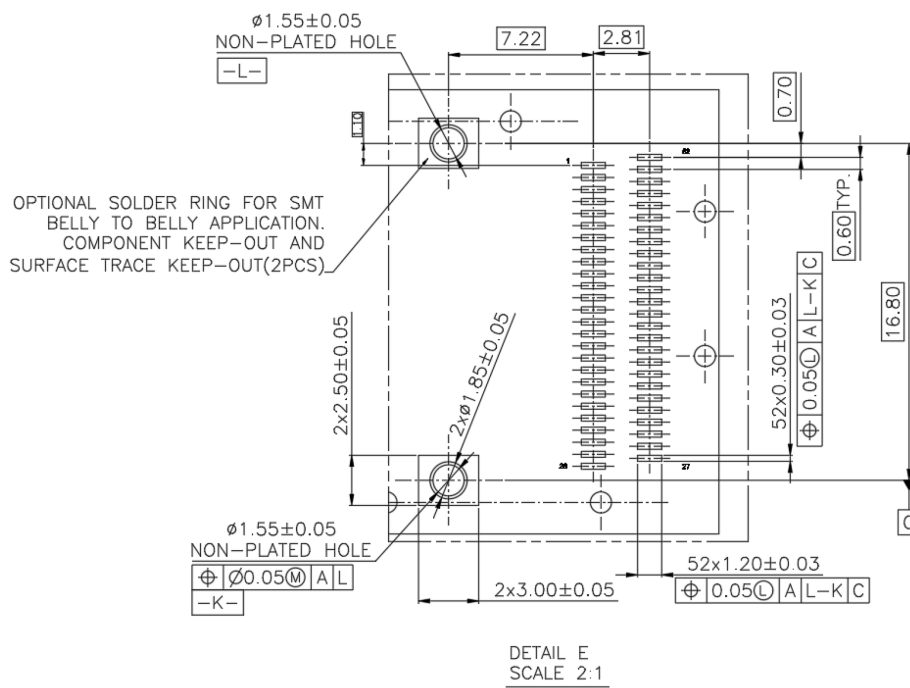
QSFP112 1x1 SMT Connector and cage PCB layout, Detail E
